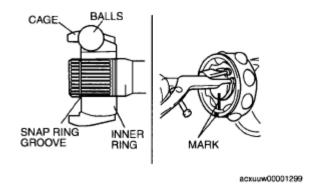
Aligning Marks Balls & Cage To Inner Ring Courtesy of MAZDA MOTORS CORP.
